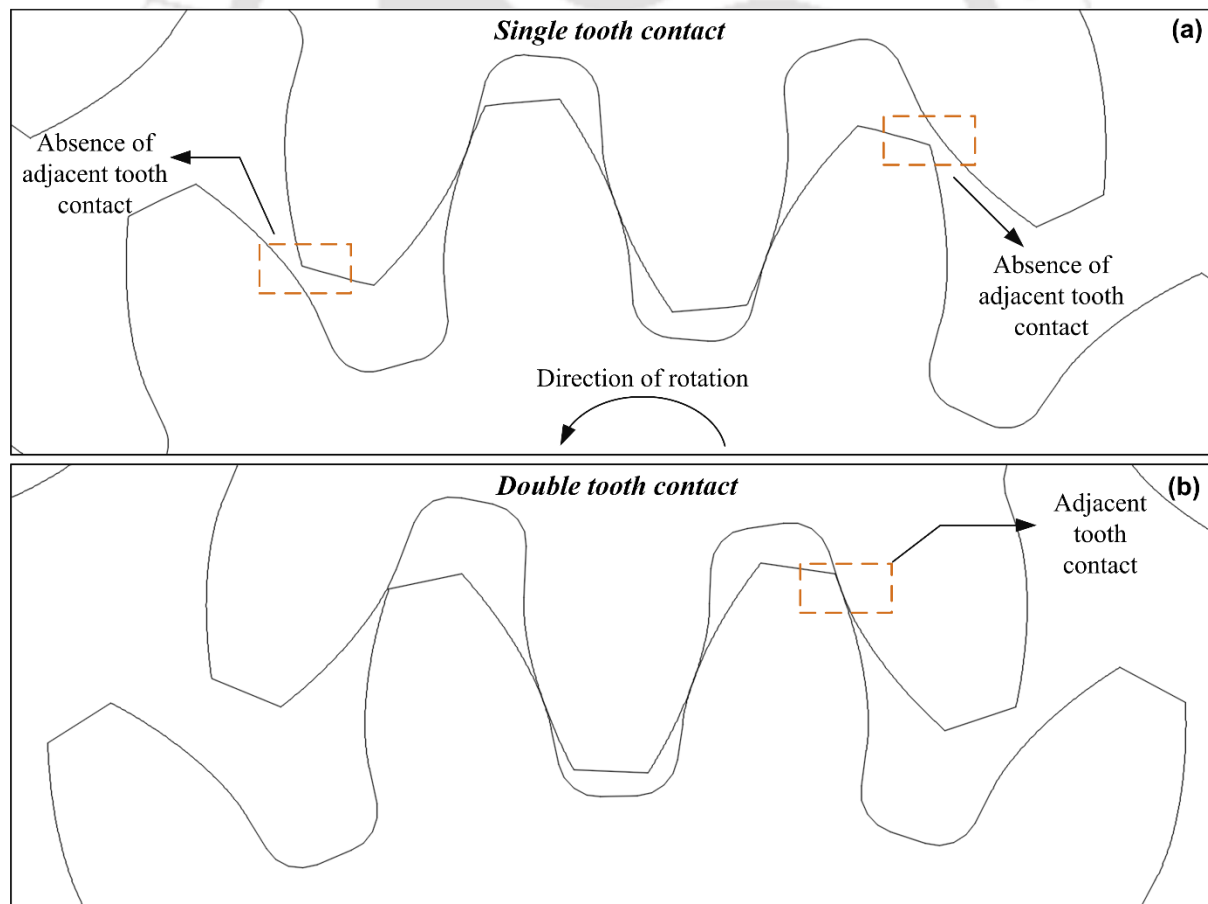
(a) Single tooth contact and (b) double tooth contact.
